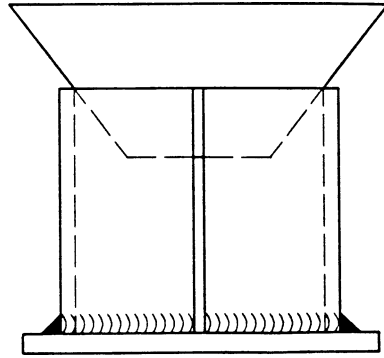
Preparation and fracture testing of test specimens for a fillet weld on pipe
